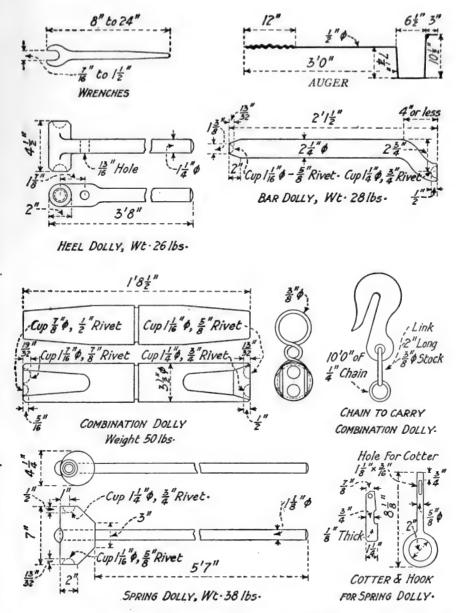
TOOLS FOR ERECTION OF ELEVATED TANKS. CHICAGO BRIDGE & IRON COMPANY.
